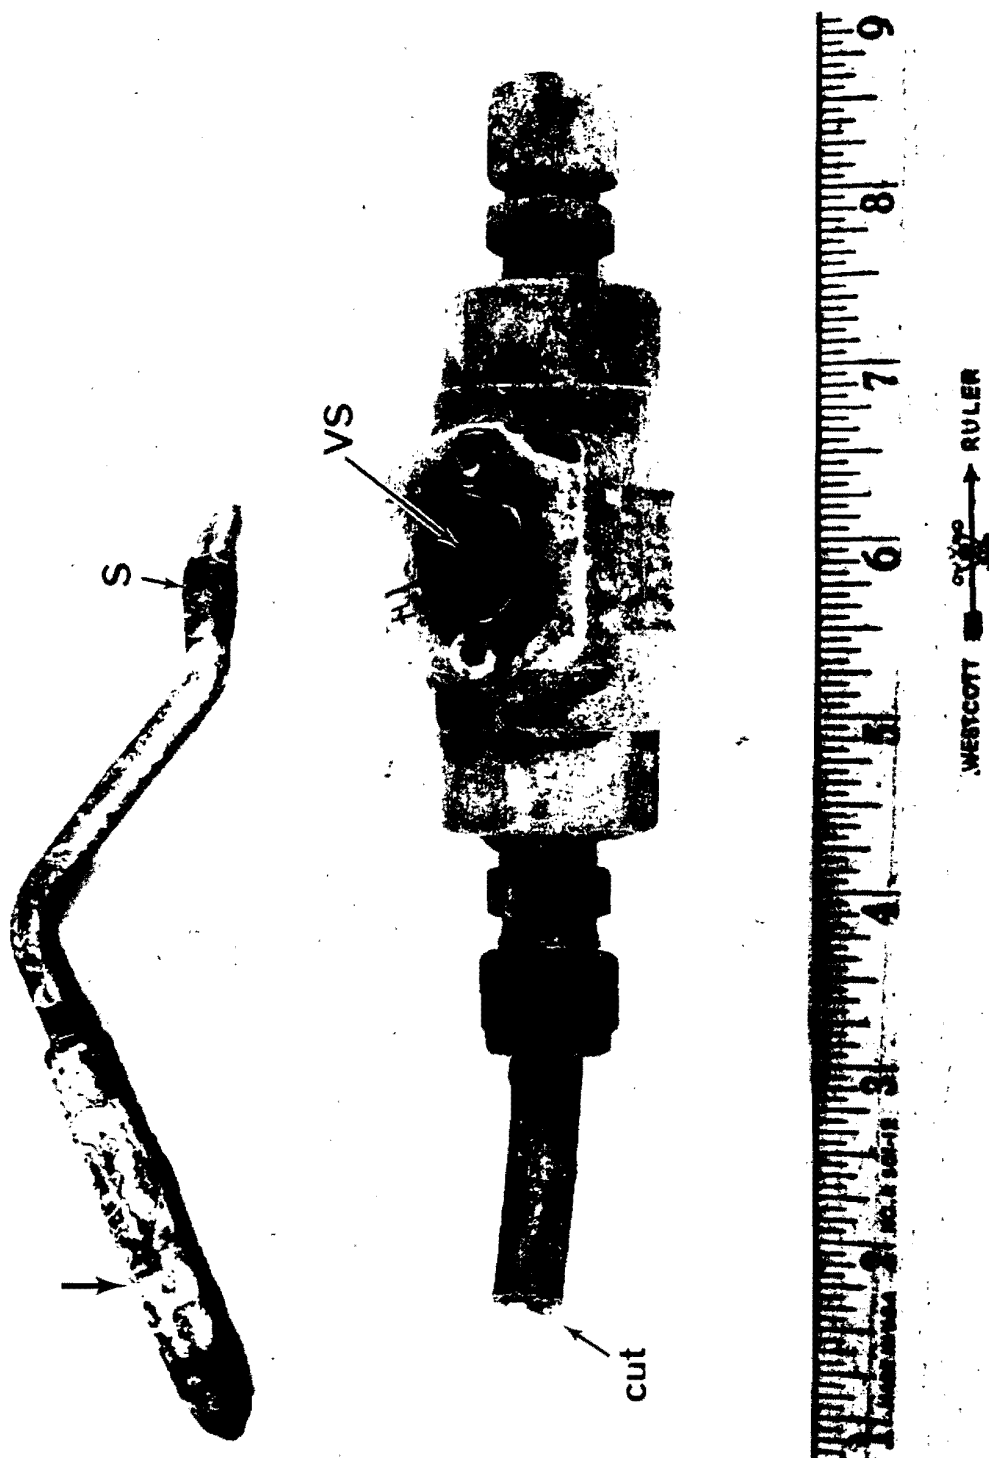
Overall view of valve body with separated handle. Arrow S indicates location of an elongated slot in the handle; arrow VS shows fractured valve stem.
